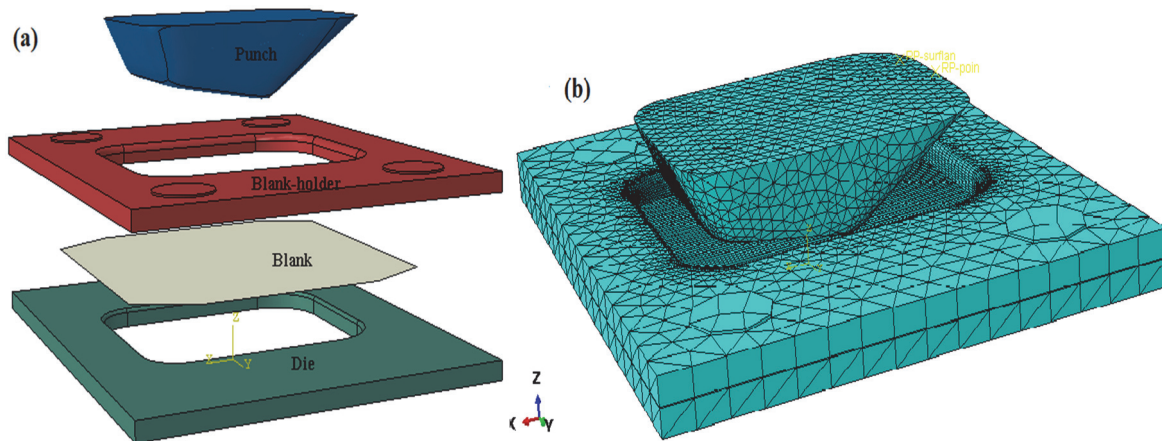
Finite-element model: (a) Tools and blank assembly, (b) Mesh of the different parts.
